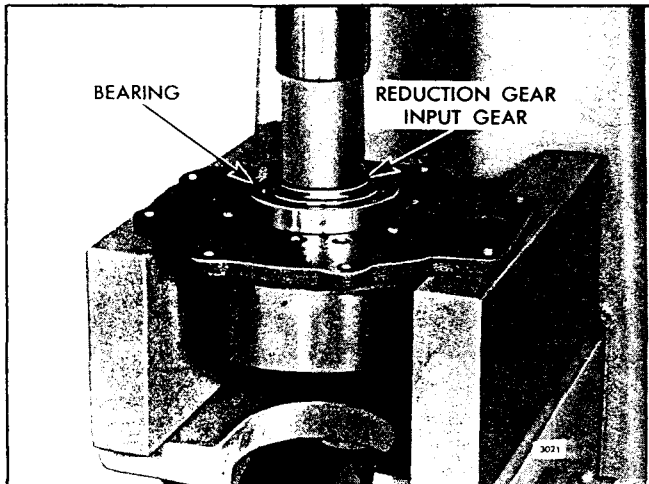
Removing Reduction Gear Input Gear from Input Gear Bearing (1.5:1 Ratio)
